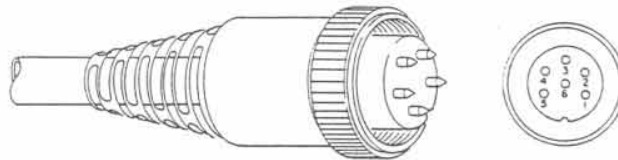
EXTRACTOR/SOLDERING IRON HANDPIECE CONNECTOR PLUG
